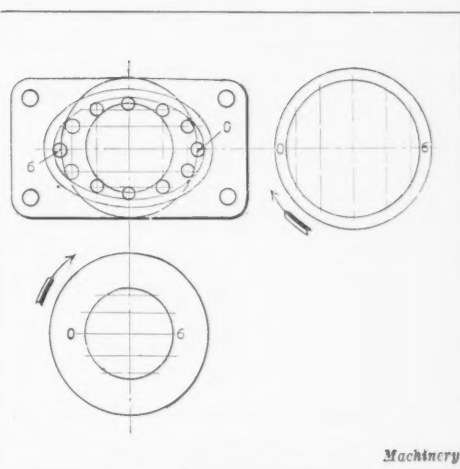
Lay-out of Work and Setting of Crankpins for Elliptical Milling
